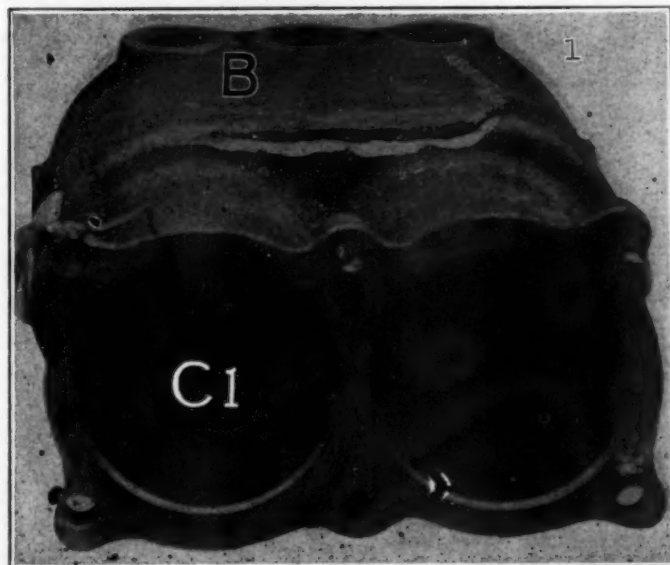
Cylinders, cracked by frost, showing V-gap for welding
